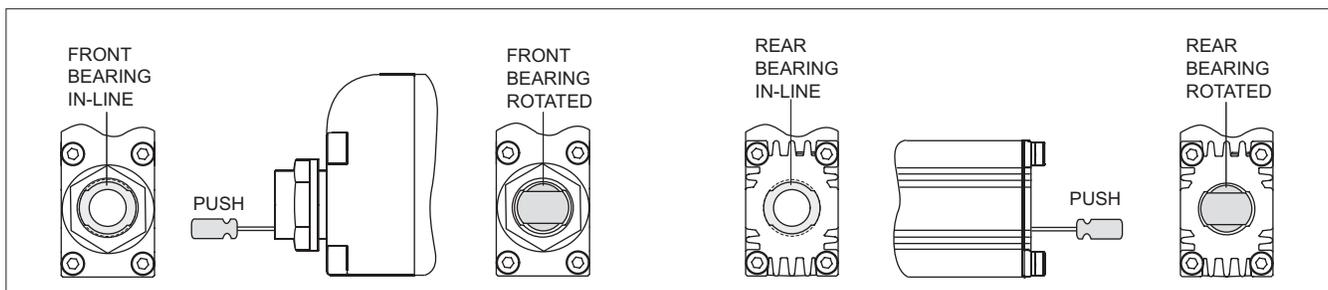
Setting the orientation of the front (left) and rear (right) spherical bearings.
